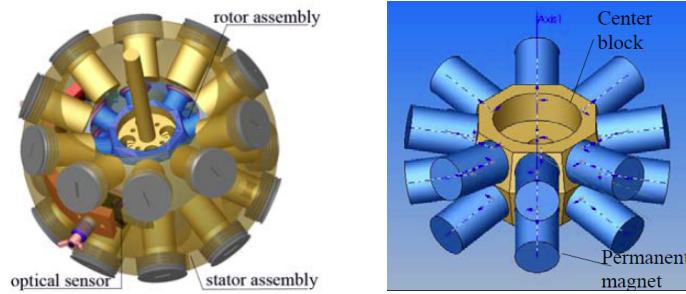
3-DOF spherical wheel motor proposed by Lee et al. [46,47]. (Left) Actuator assembly. (Right) Rotor assembly.
